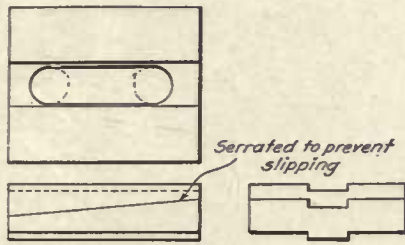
Adjusting Wedge for Elevating Center Chuck Block in Milling Wedges.
